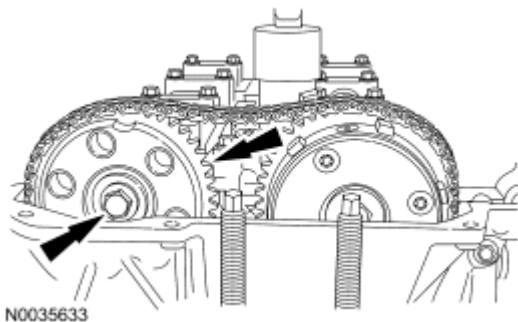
Locating Exhaust Camshaft Drive Gear Bolt
